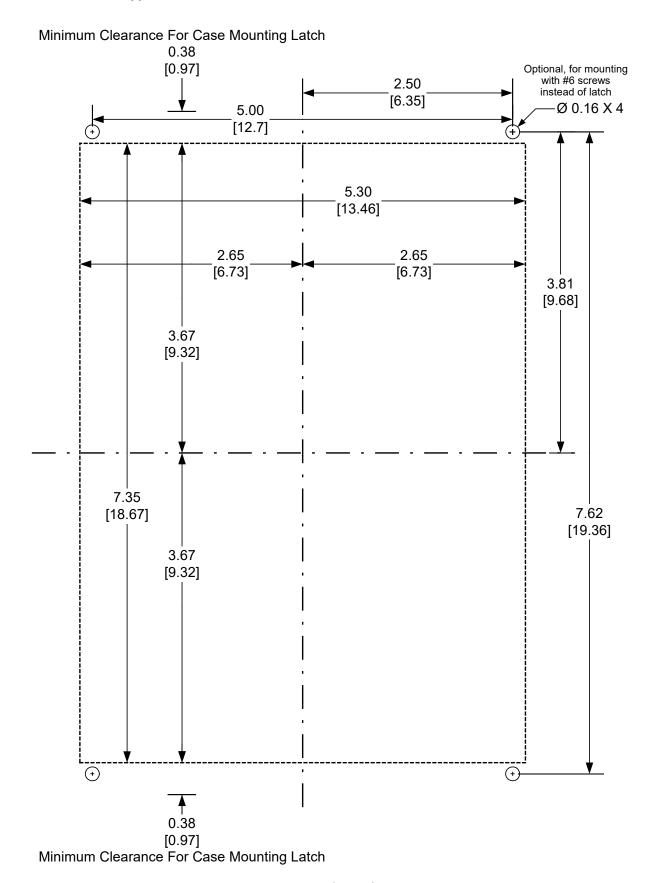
M-7679 Vertical Panel Cutout Dimensions
